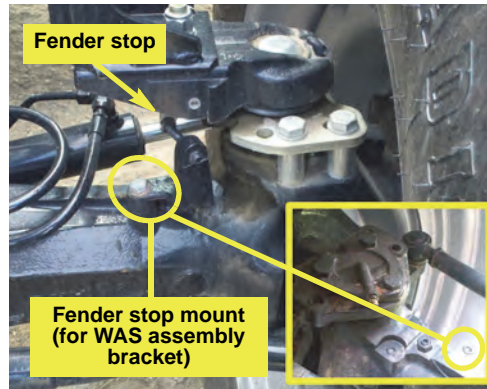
with inset: WAS bracket mounting location - inset is without fender mountings
